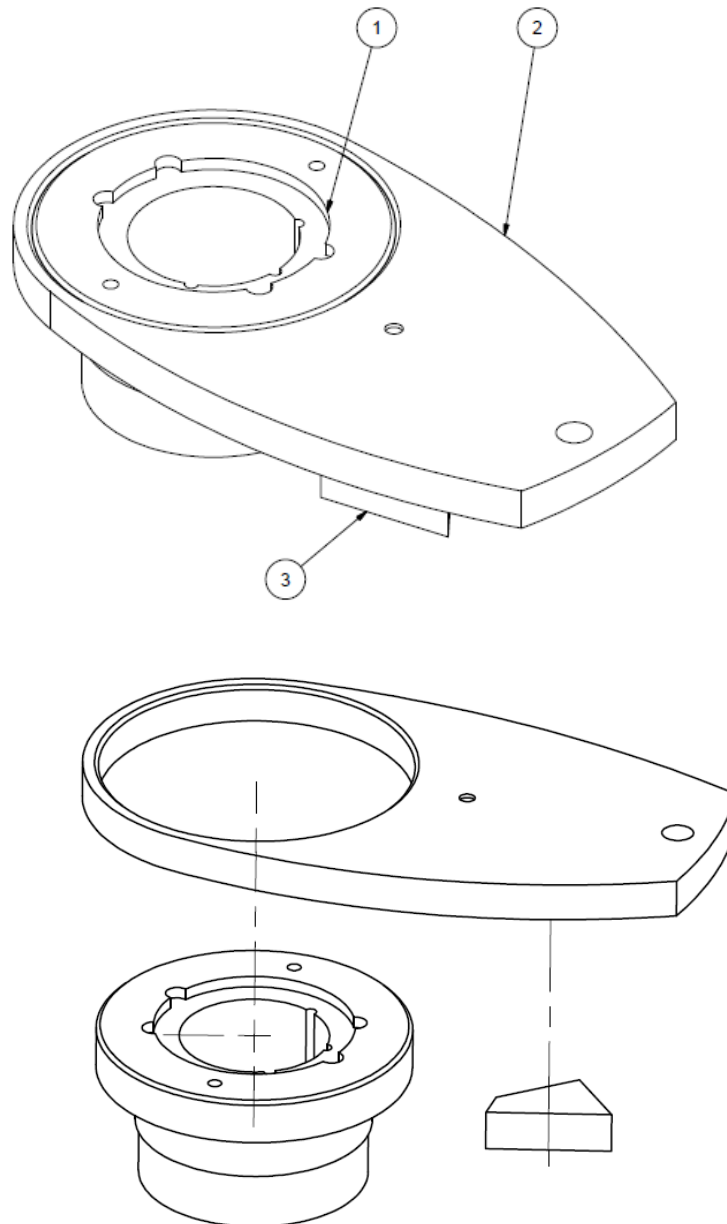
Proposed wicket gate lever assembly with exploded view [3]
